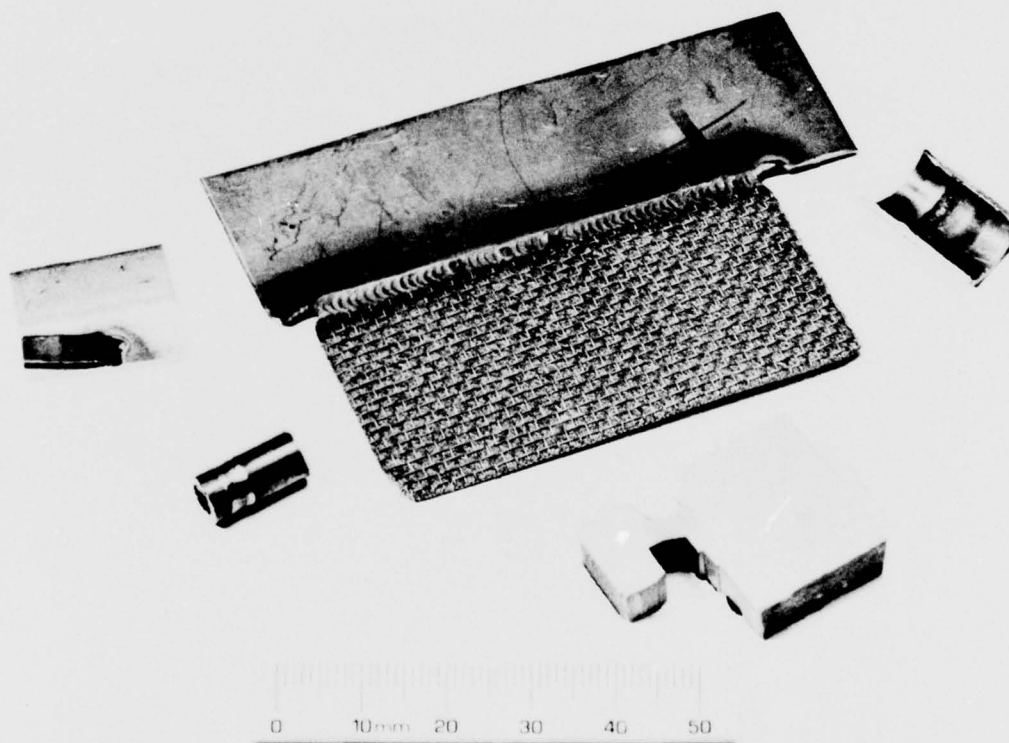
Examples of various welded joints made with a transistorised power source.
